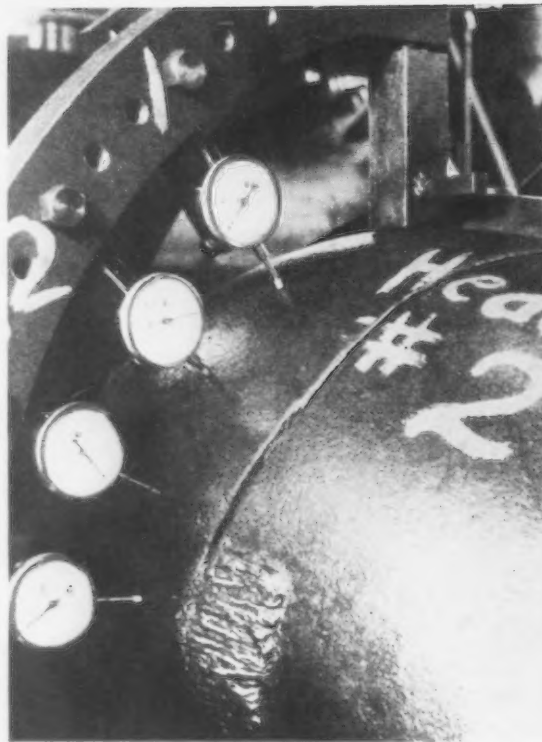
Long Crack Skirting Edge of Welded Patch in Drum Head of Manganese Steel
